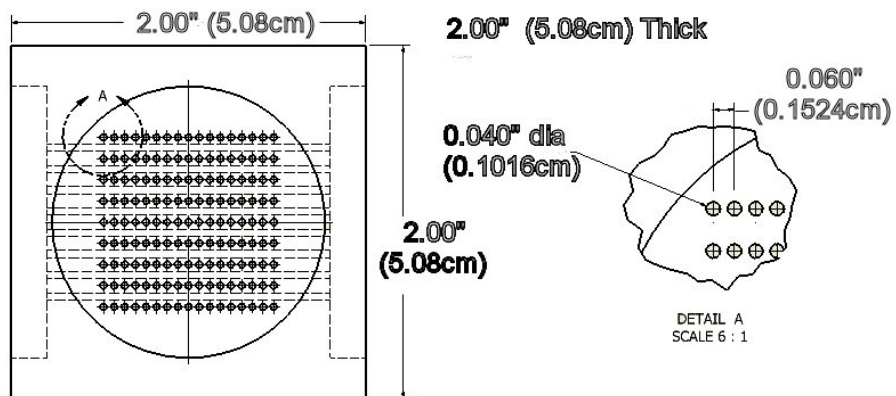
Dimensioned drawing of the design 2 cross flow heat exchanger (courtesy of Mark Humphrey)
